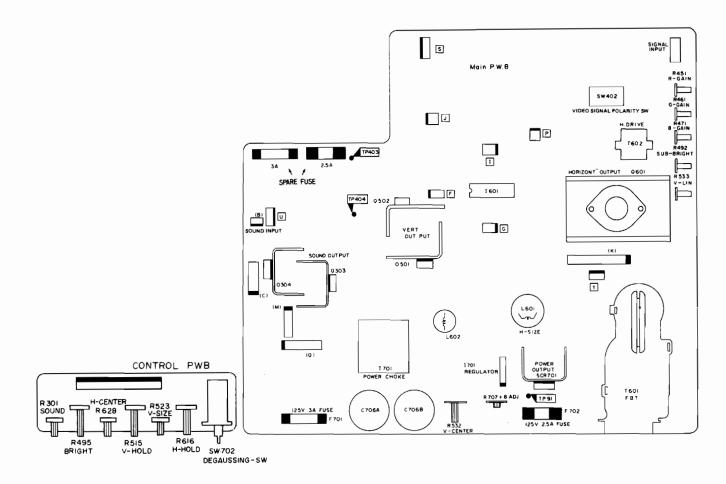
Adjustable Controls and Test Points on Main Chassis PCB and Control PCB
